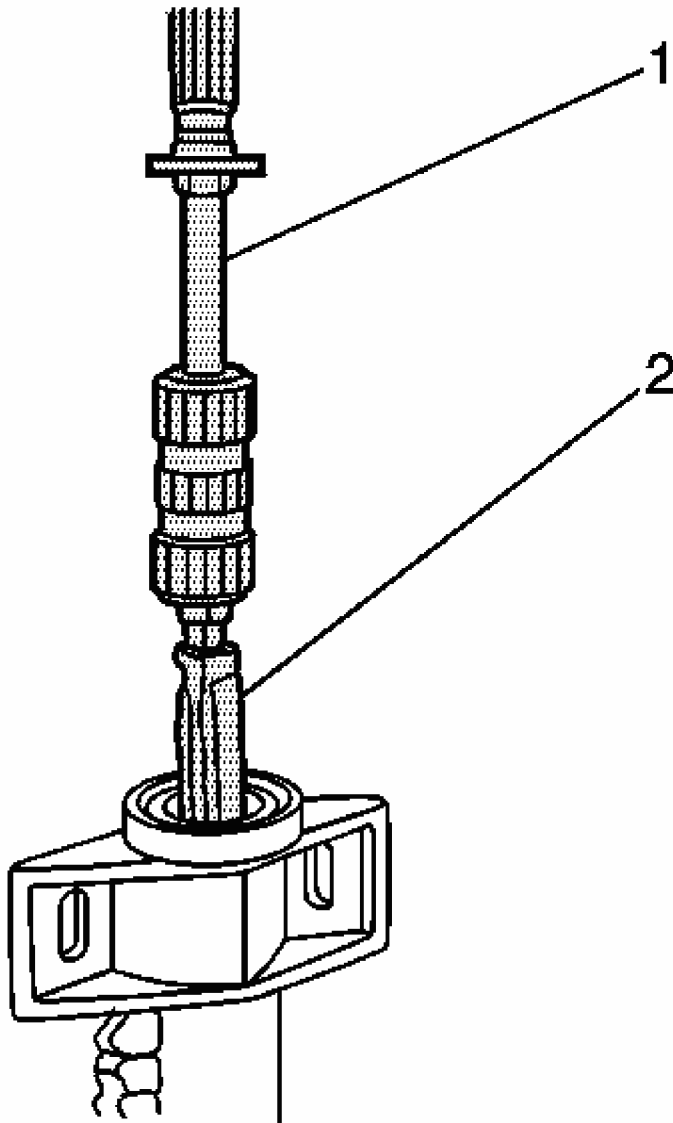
Removing Inner Axle Shaft Bearing & Seal
